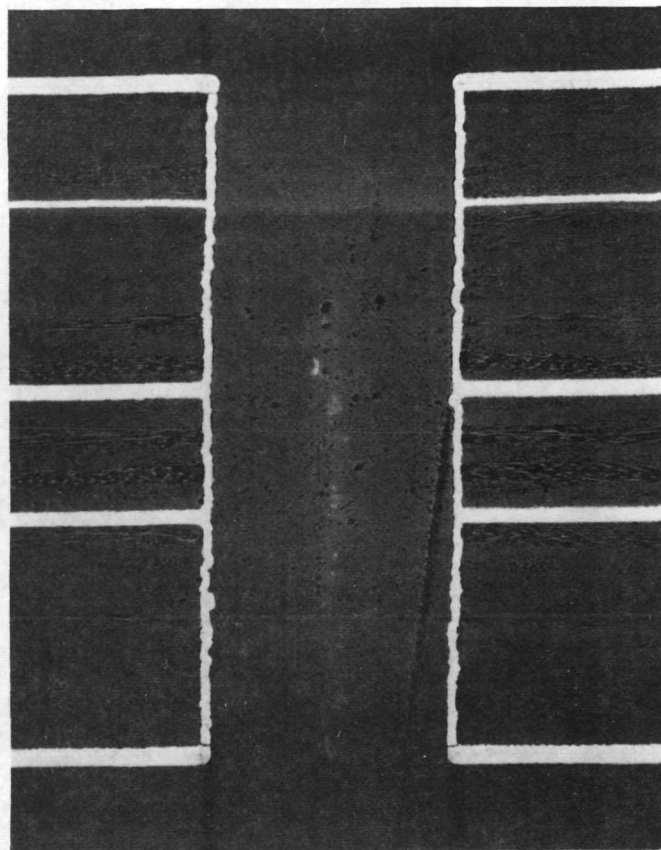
Photomicrograph (35X) of a Cross Section of a Typical Plated-Through Hole with Crack Defects.
